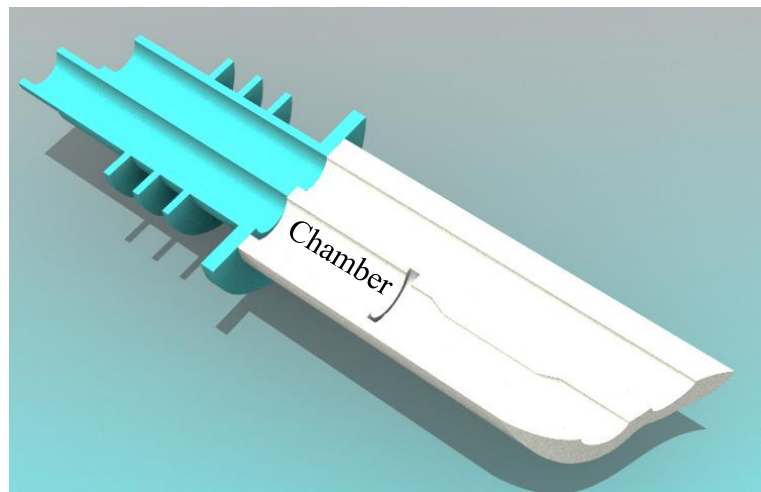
Section of pour spout showing the chamber for the mechanism.
